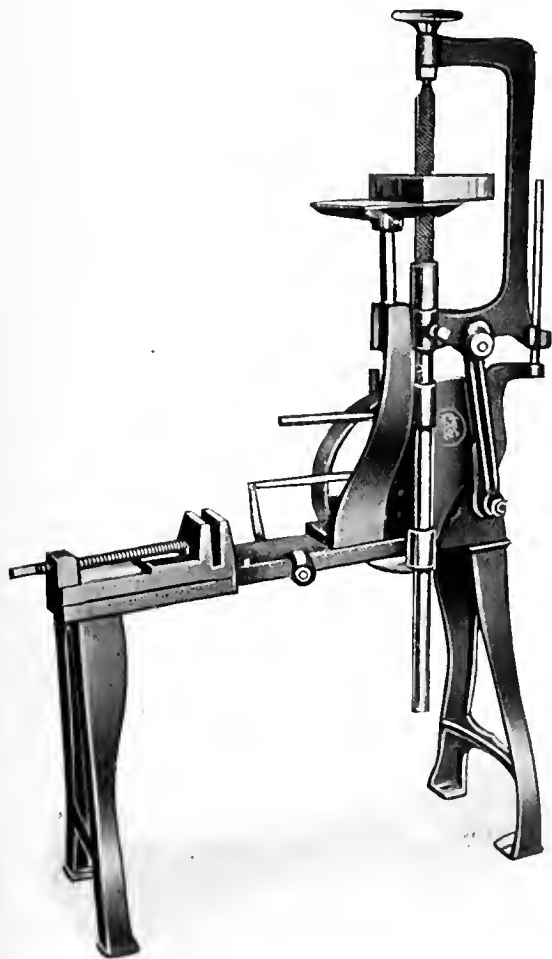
Robertson's "Royal" Power Hack-saw arranged to be used as a Filing Machine.
